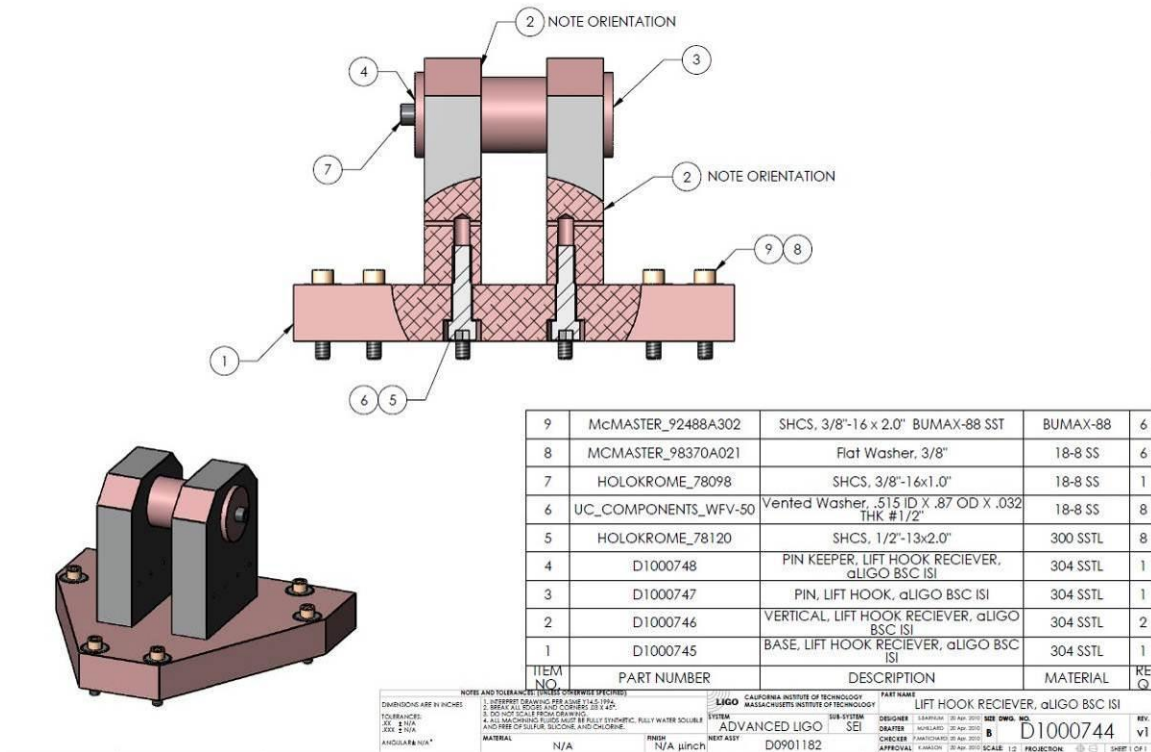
D1000744 Lift Hook Receiver Assembly Drawing
